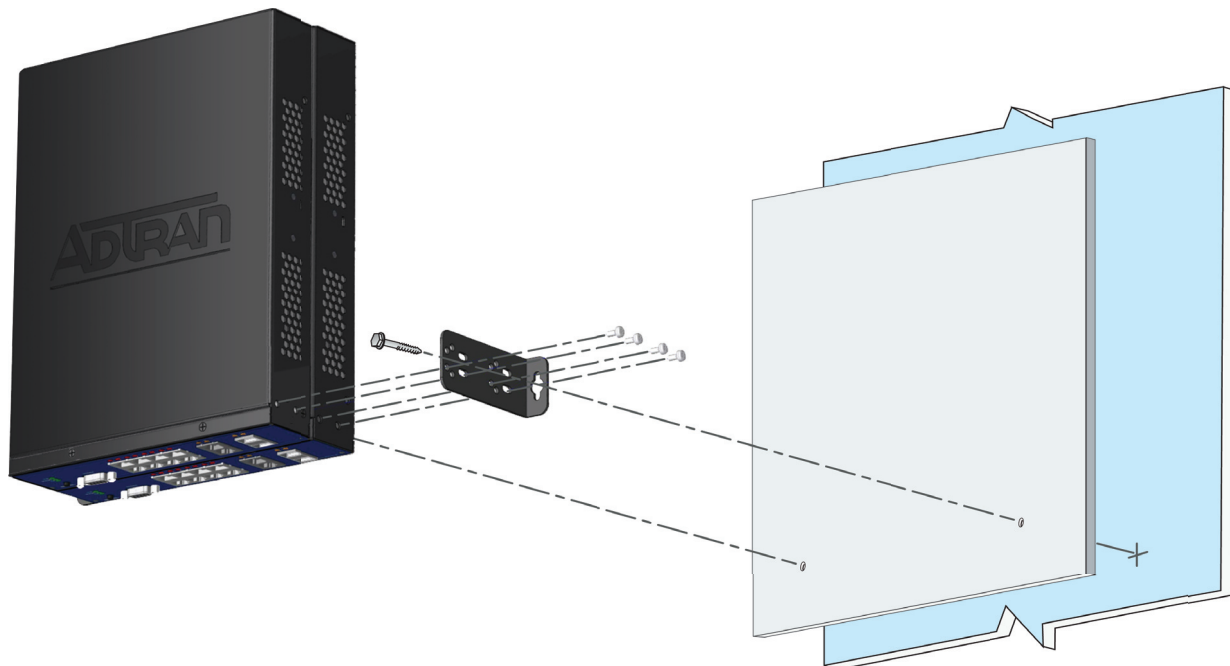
NetVanta 1531/1531P/1534/1544 Dual Wallmount Installation
